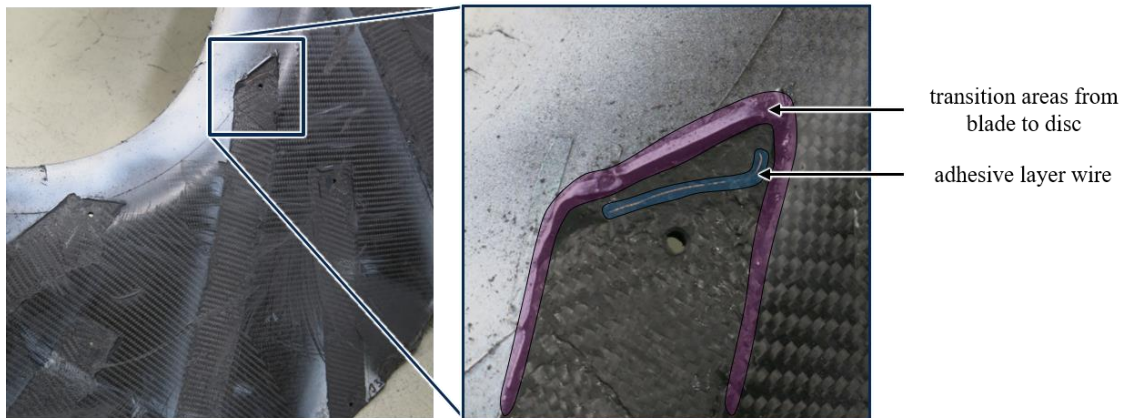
fragments of impeller 1 with the potential crack initiator in the form of the inserted adhesive layer wire
